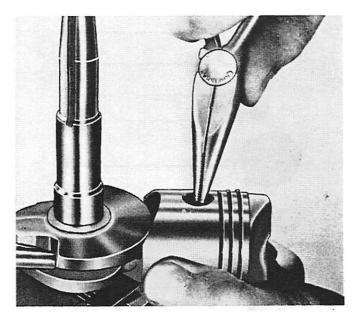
Removing (and Installing) Piston Pin Lock Ring
